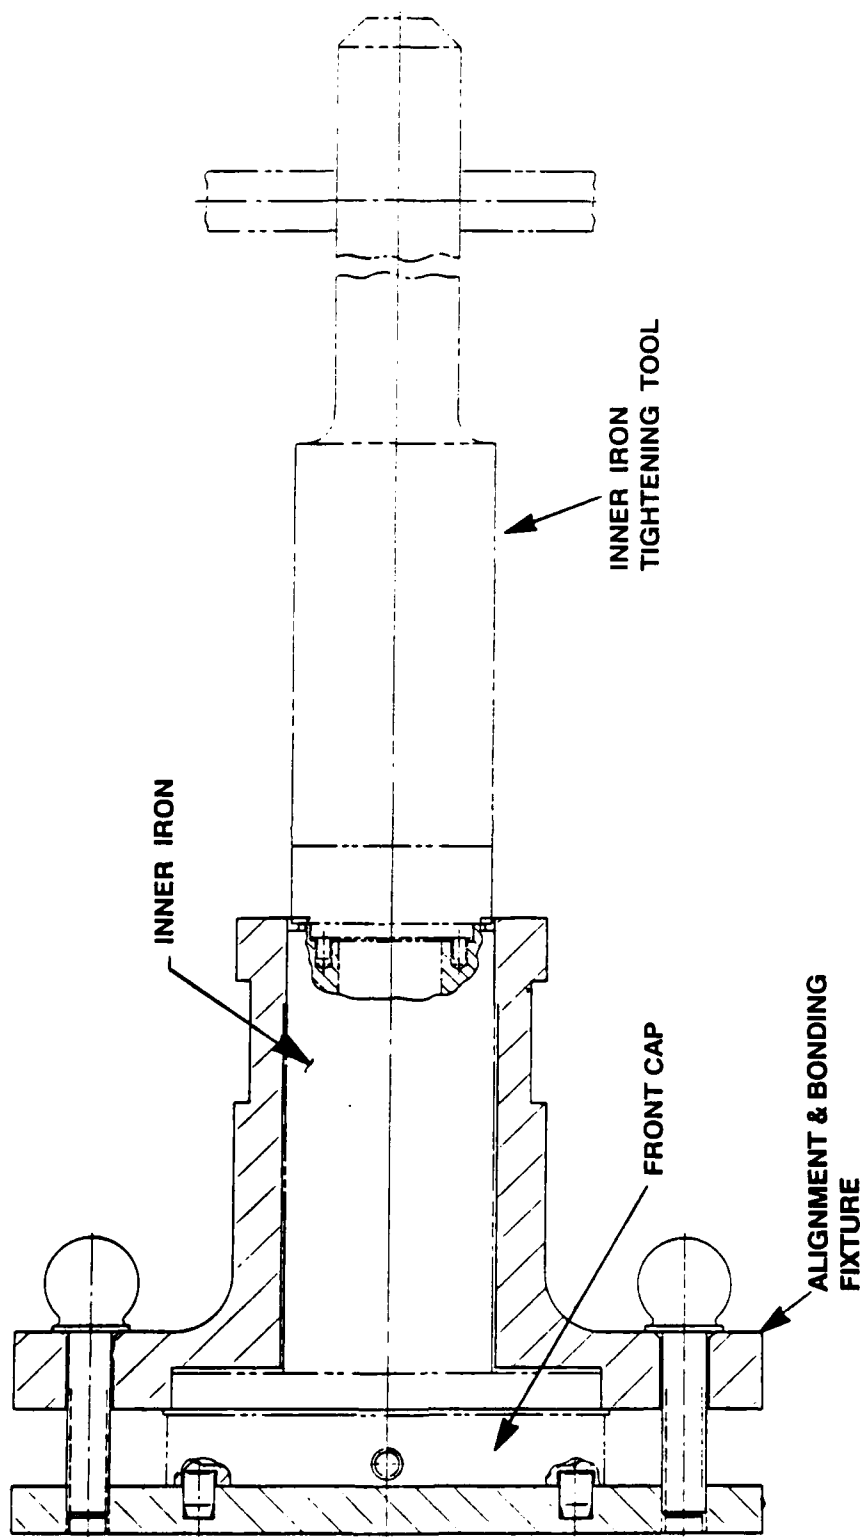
Front Cap/Inner Iron Alignment and Bonding Fixture
